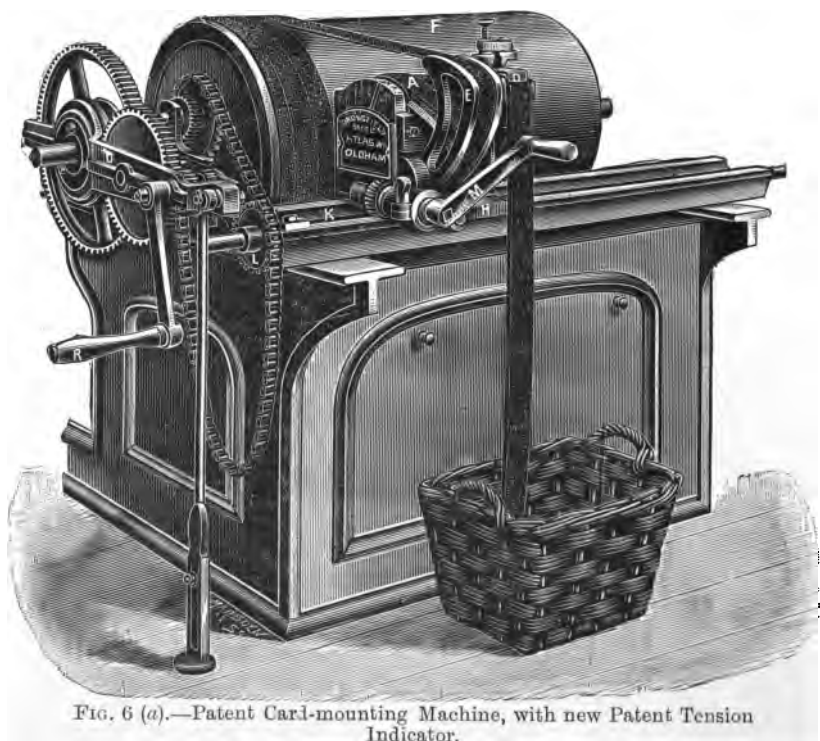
(a).—Patent Card-mounting Machine, with new Patent Tension Indicator.
